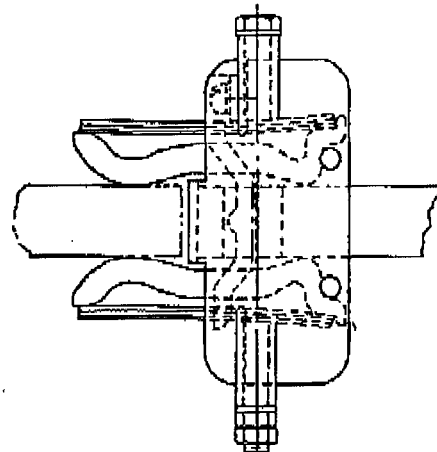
B. Primary disconnect assembly (for AKT-50), Ref. No. 220A.
